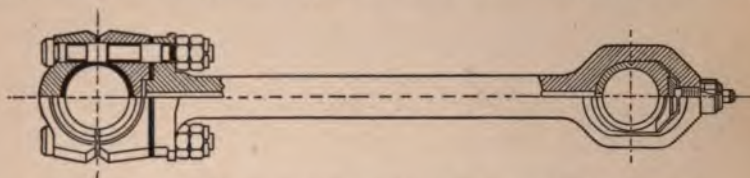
Connecting rod for Diesel engine (weight, 165 pounds)
